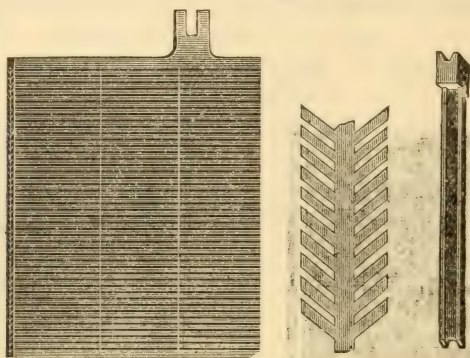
FRONT VIEW AND CROSS-SECTION OF PLATE OF AMERICAN STORAGE BATTERY WITH SEPARATOR.
